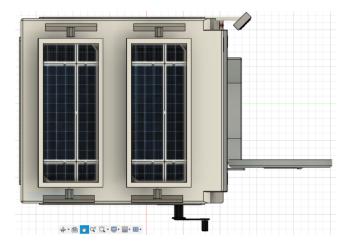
Sketch of the proposed washing machine design, viewed from the top. Designed using Autodesk Fusion 360.
